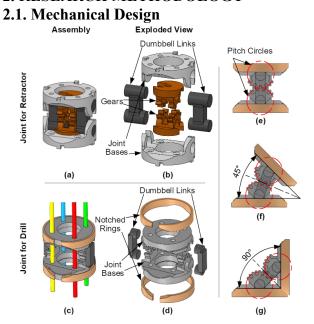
Design of a tendon-driven rolling joint with an inner lumen. (a)Joint assembly for the retractor; (b) exploded view of (a);
